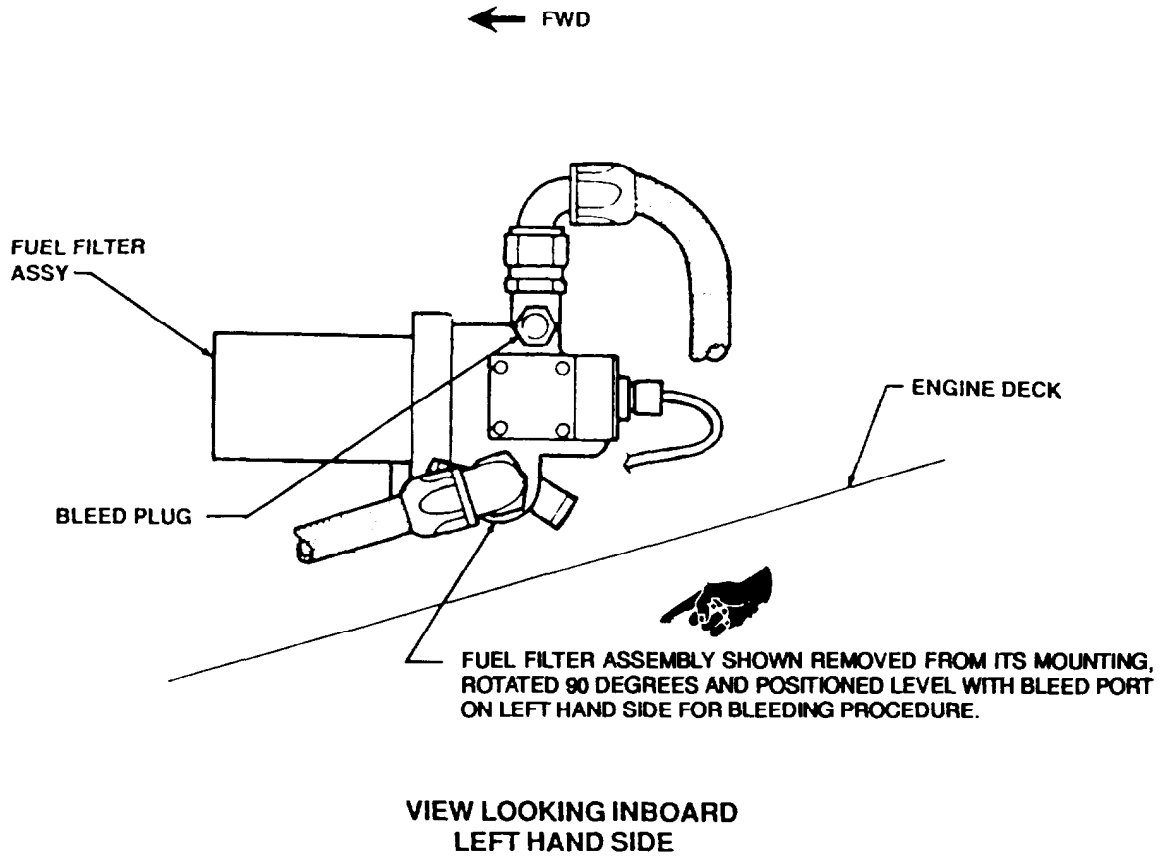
Bleeding Airframe Fuel Filter Assembly
